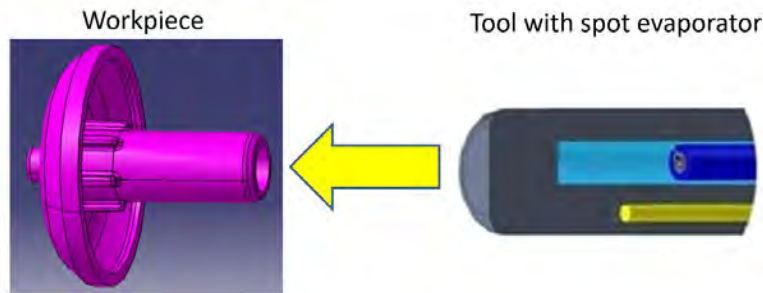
Hot spot cooling with a spot evaporator during injection molding [77]
